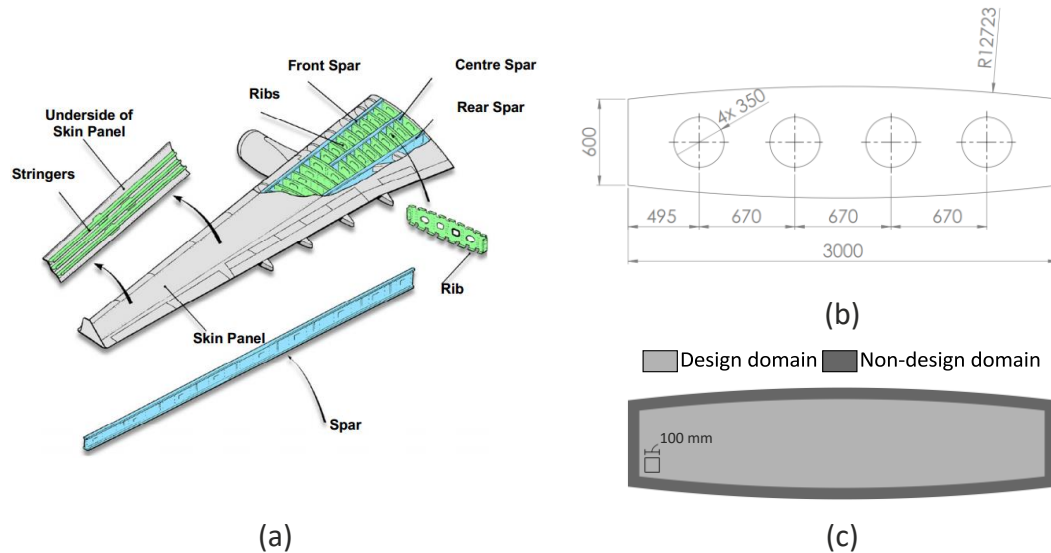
(a) Aircraft wing components (image from [174]); (b) Conventional rib model dimensions (mm); (c) Initial design model
